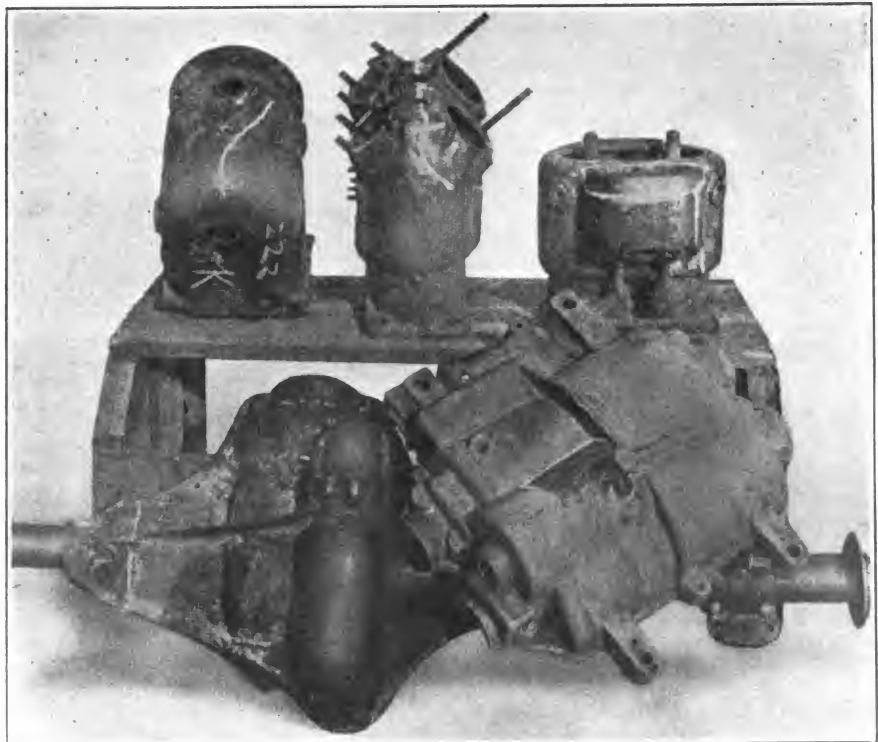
A GROUP OF REPAIRED CASTINGS—CHALK MARKS SHOWING WHERE THEY WERE CRACKED OR BROKEN
